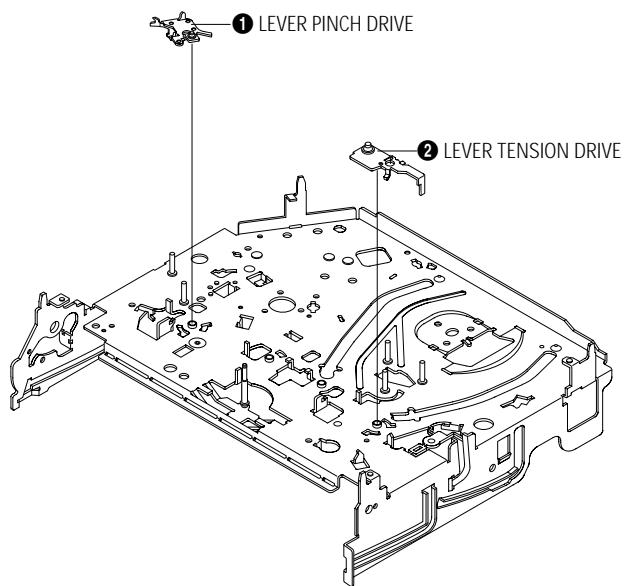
Lever Pinch Drive, Lever Tension Drive Removal
